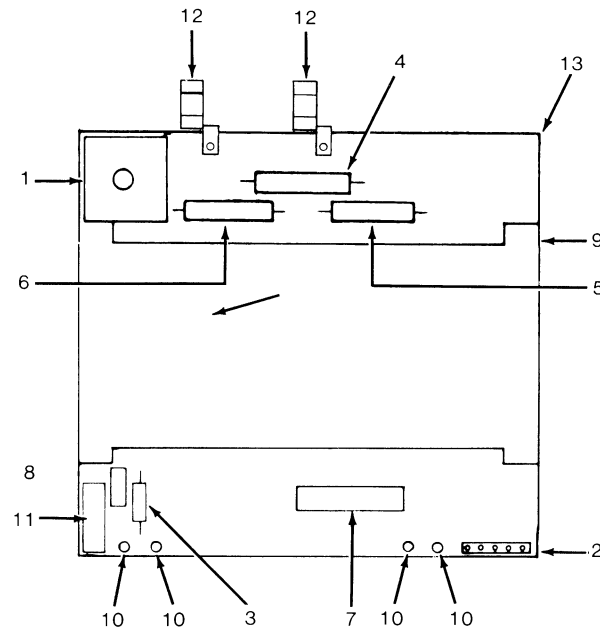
Small Circuit Board Assembly (3010, 3020, TECH 300, and TECH 310) for Part Location
